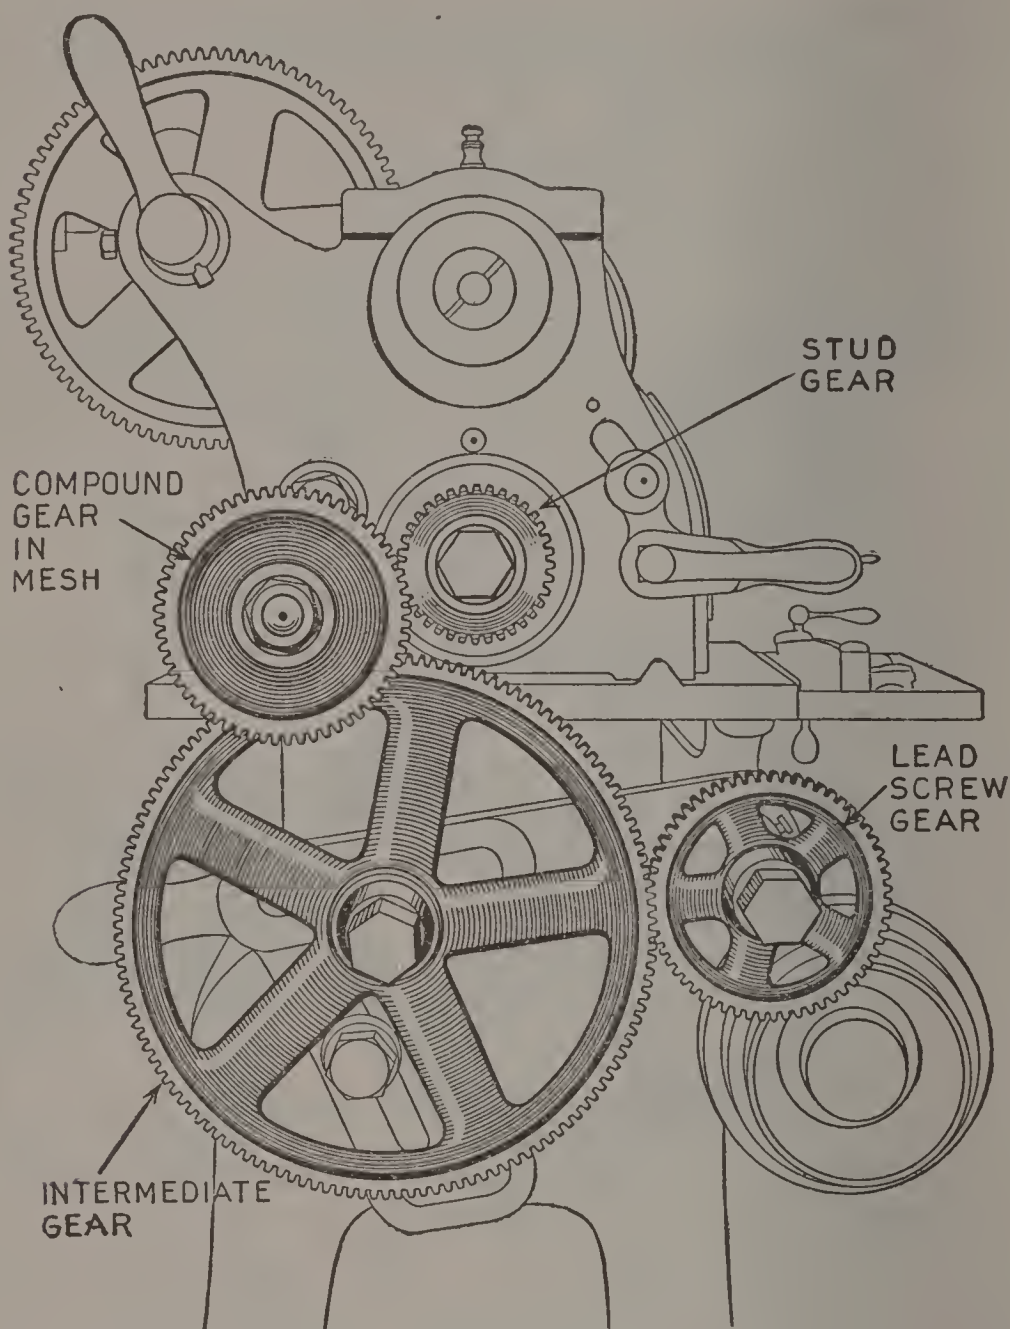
COMPOUND GEARS FOR THREAD CUTTING
